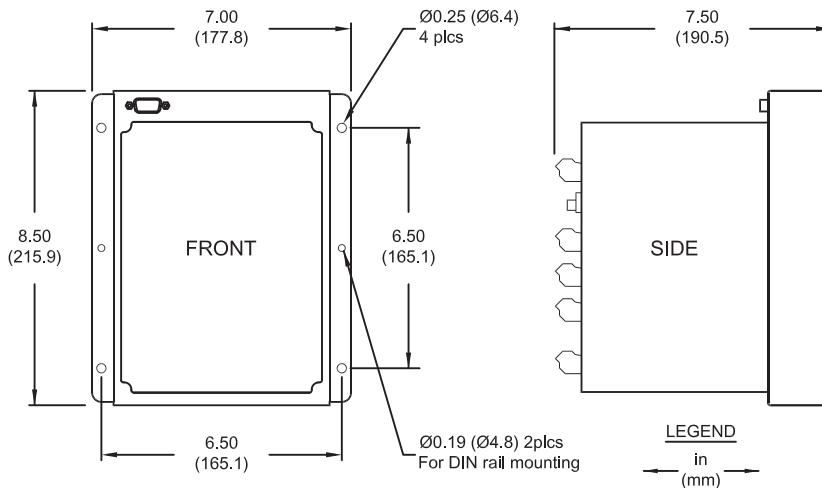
Programmable Automation Controller Surface-Mount Dimensions
